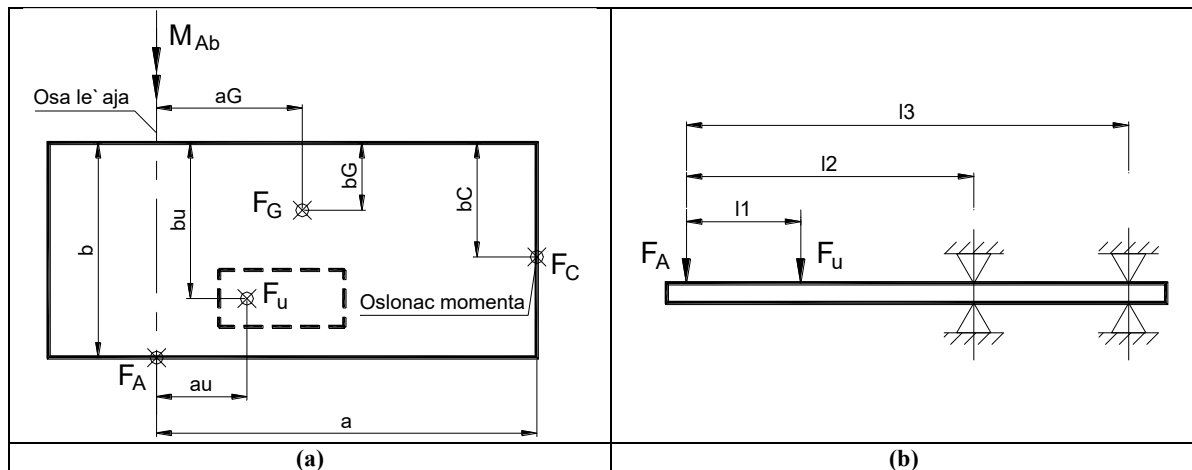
(a) Gear box load display (top view); (b) Positioning and loading of the planetary shaft of the drive gear
